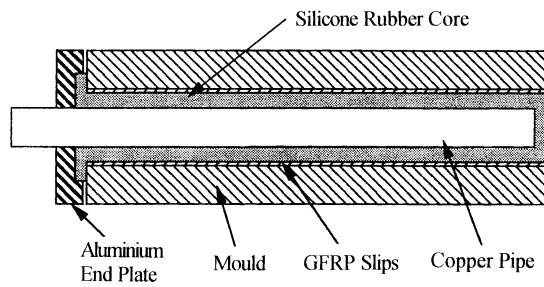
Arrangement of the mould assembly for manufacturing the hollow silicone mandrel.
